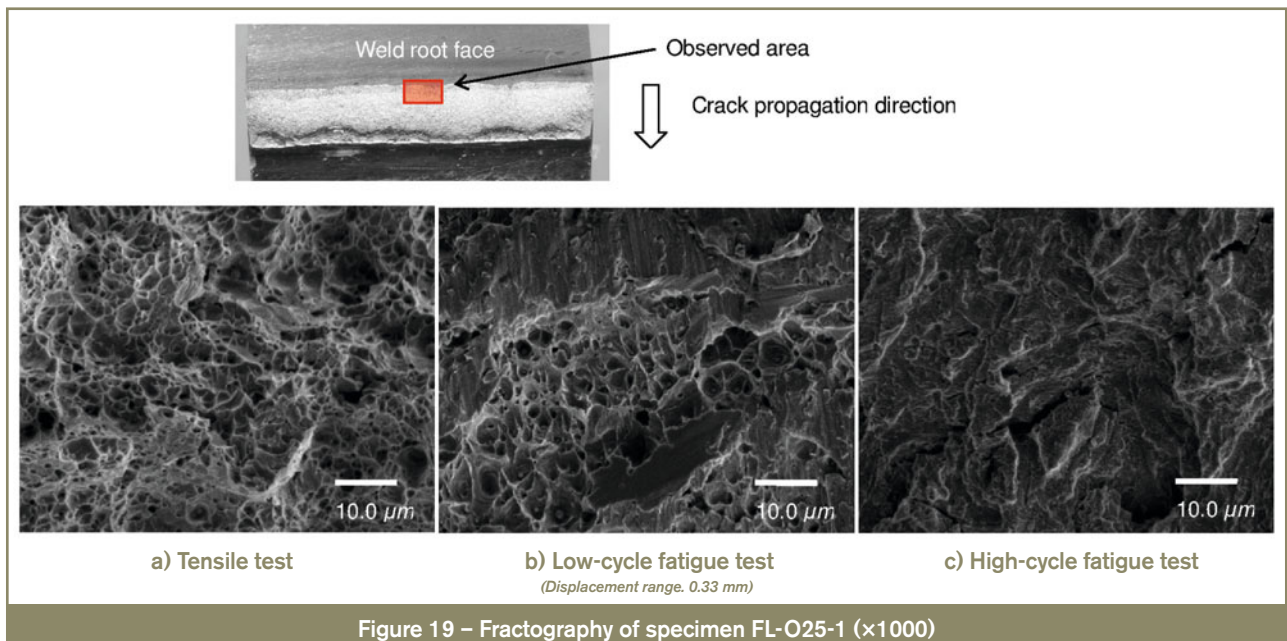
Fractography of specimen FL-O25-1 (×1000)
